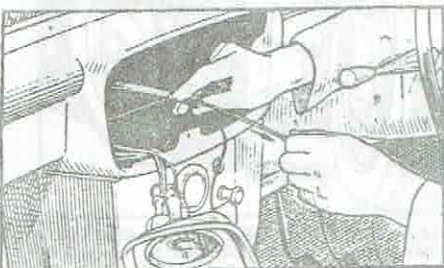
REMOVAL OF INNER SHAFT. Most inner shafts can be removed by disconnecting instrument end and pulling out shaft. Some must be removed from point of drive end after first taking off C washer at instrument end. Broken inner shaft will have to be withdrawn from both ends.
